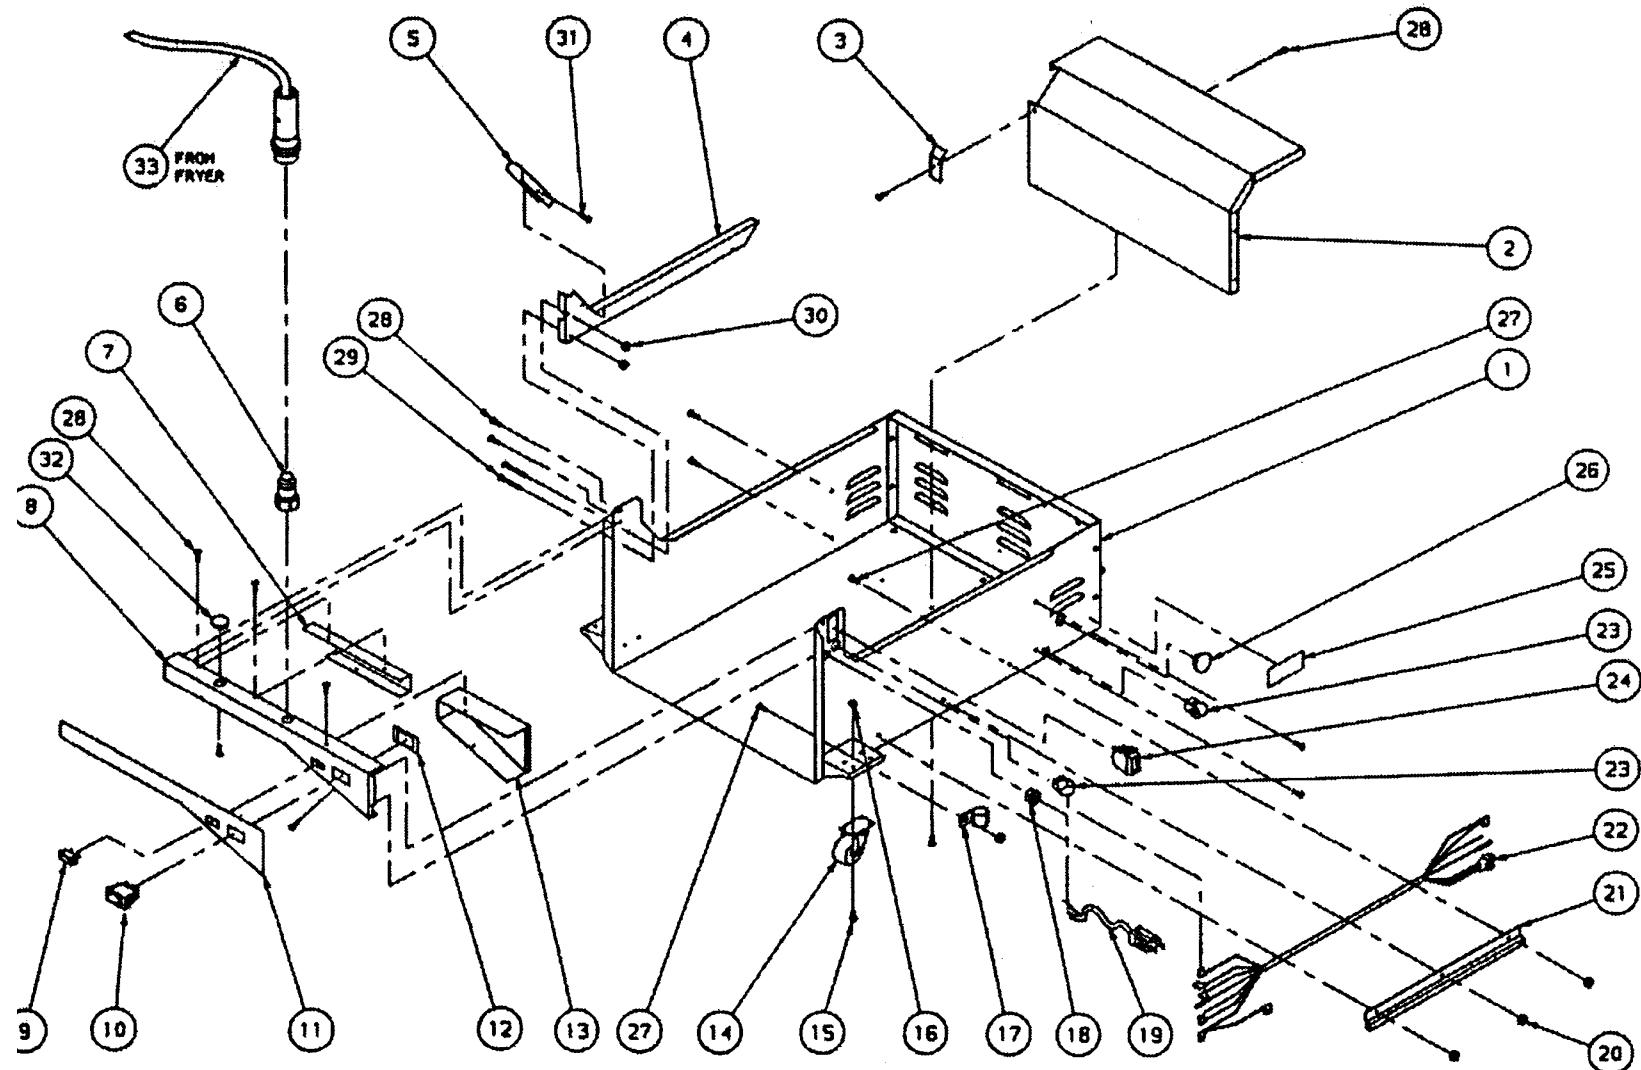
UFM Filter, Frame/Electrical Assembly
